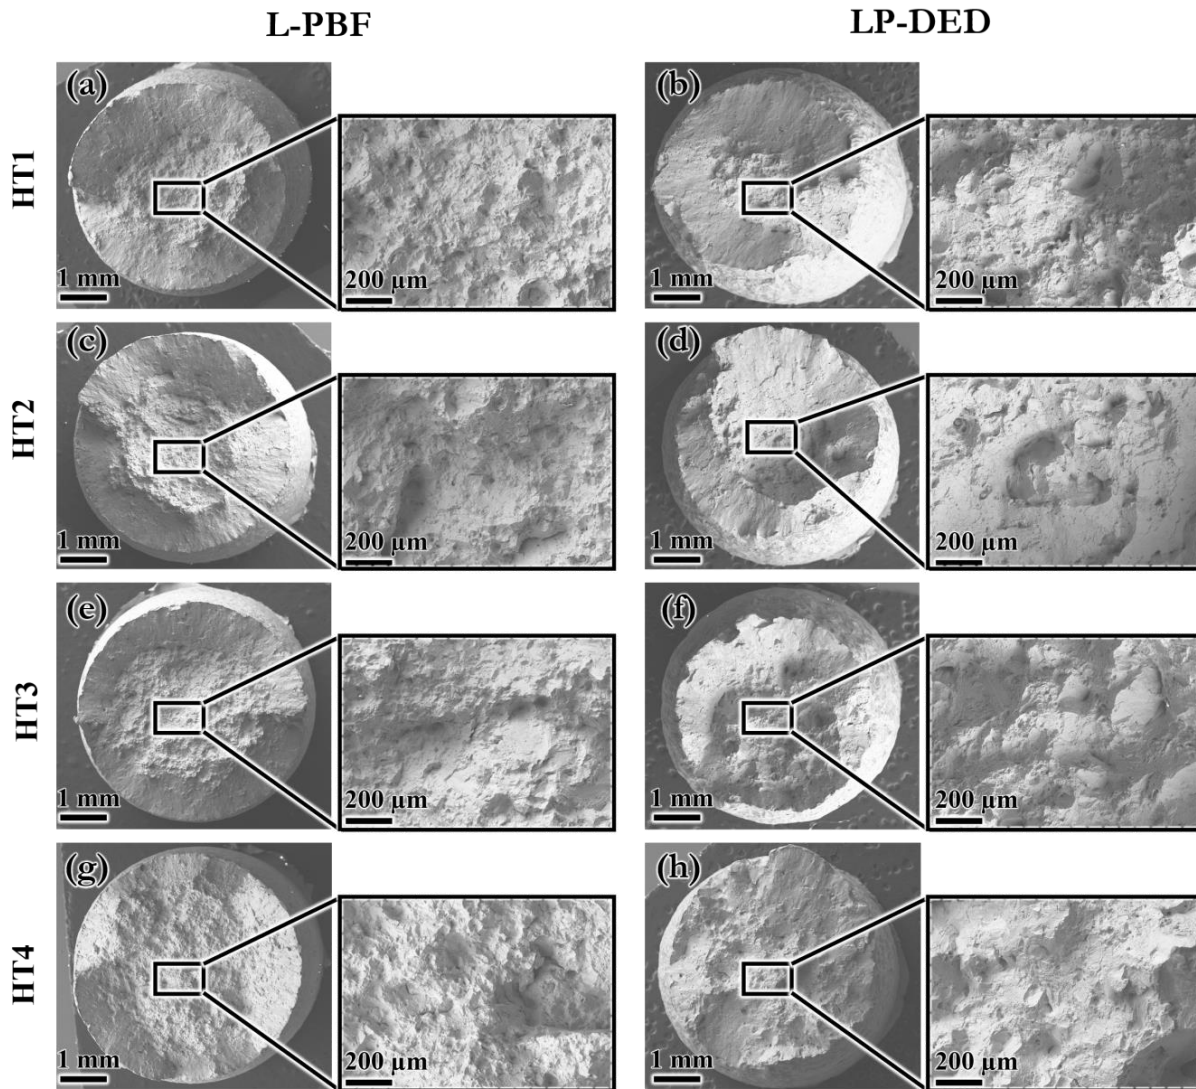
Tensile fracture surfaces of heat treated L-PBF and LP-DED Monel K500 specimens: in (a) & (b) HT1, in (c) & (d) HT2, in (e) & (f) HT3, in (g) & (h) HT4 conditions.
